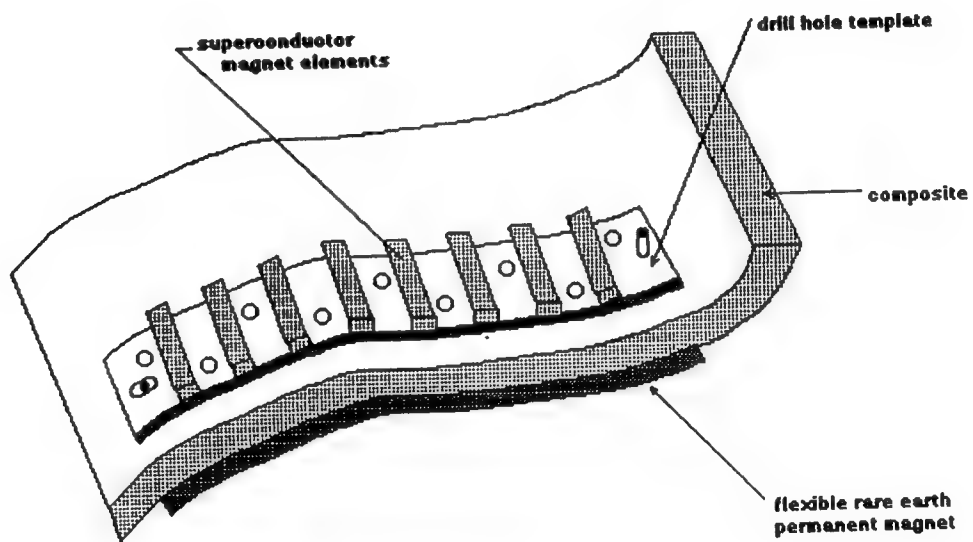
Superconductor array with a flexible permanent magnet latching assembly.
